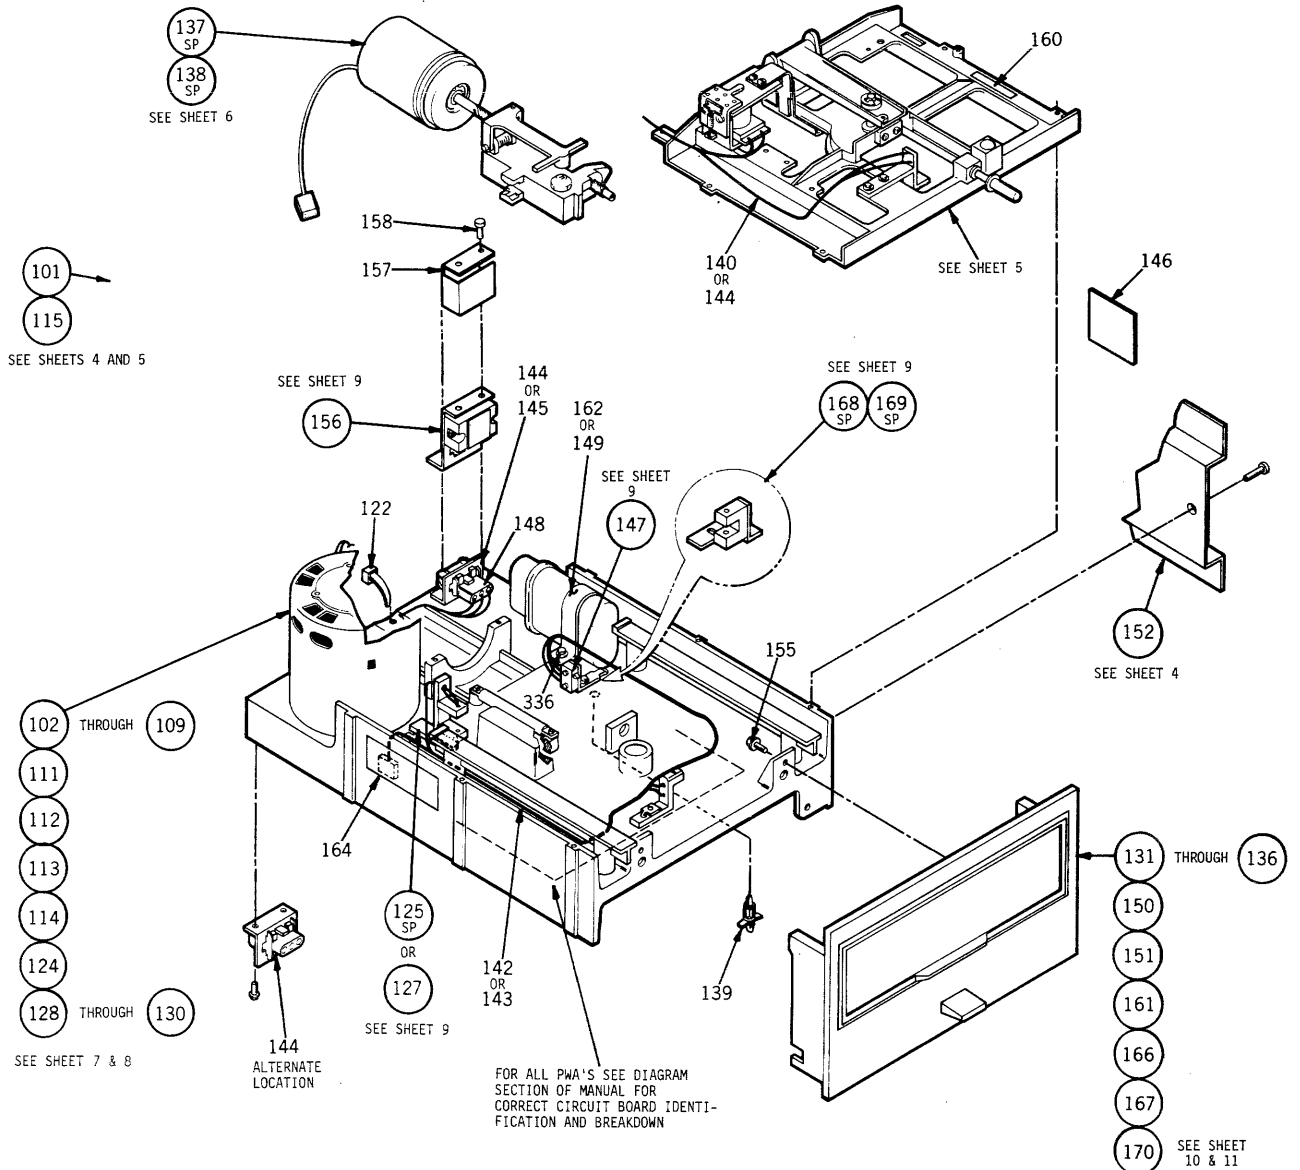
TOP MECHANICAL ASSEMBLY
